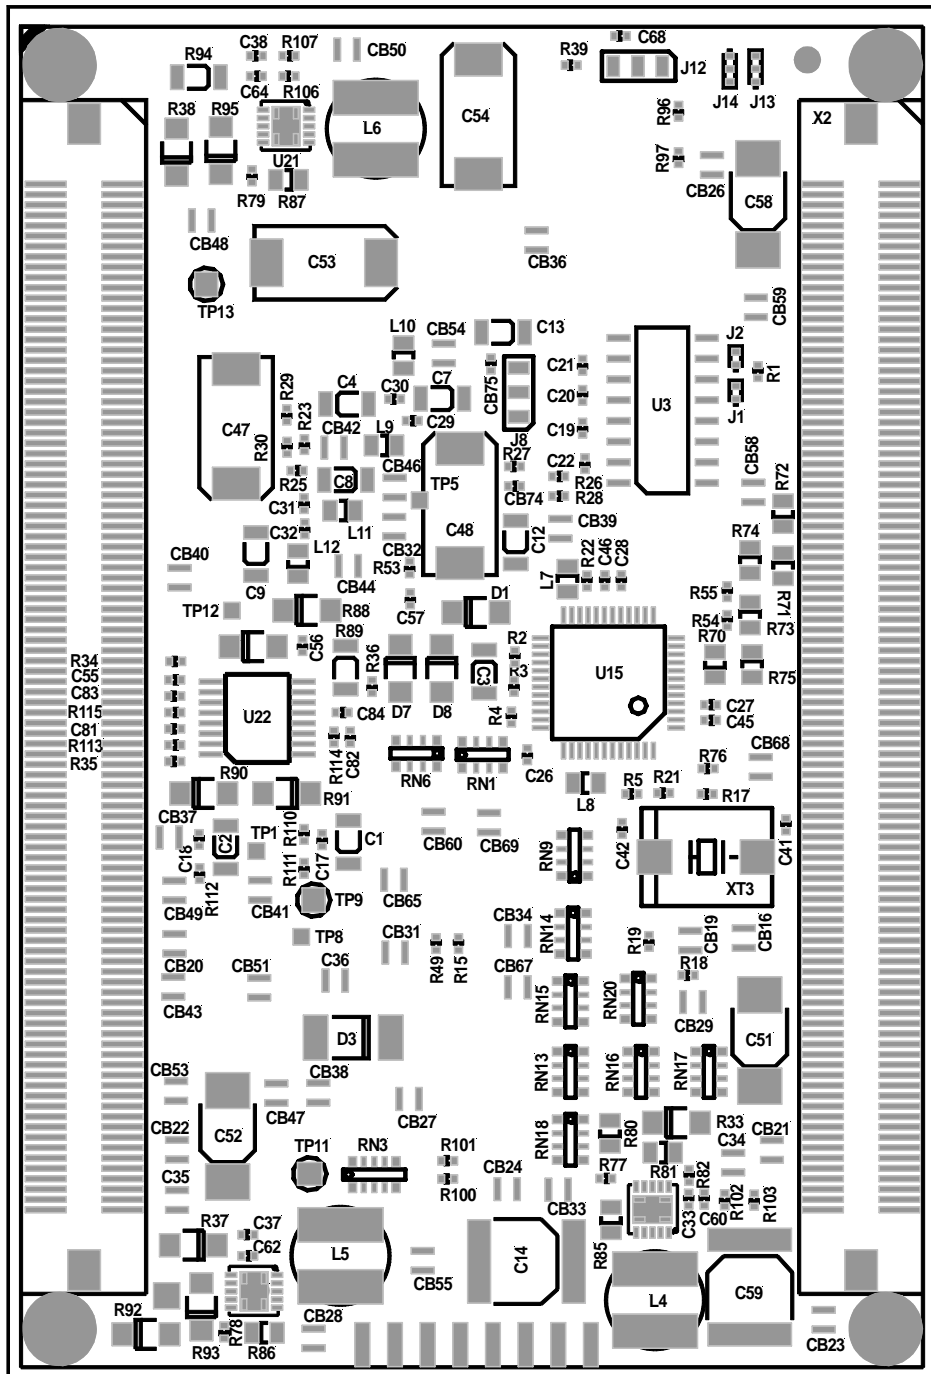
phyCORE-MPC5200B-I/O Component Placement, Bottom View
